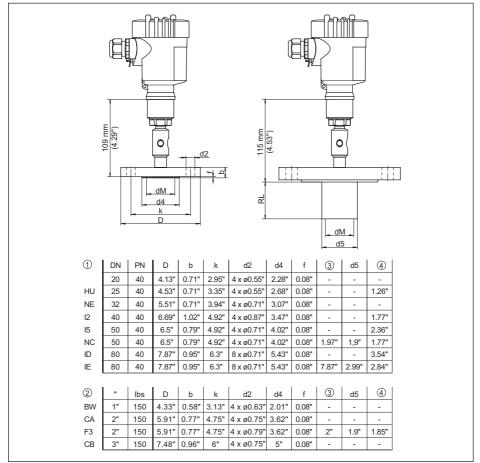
VEGABAR 81, flange connection, dimensions in inch
